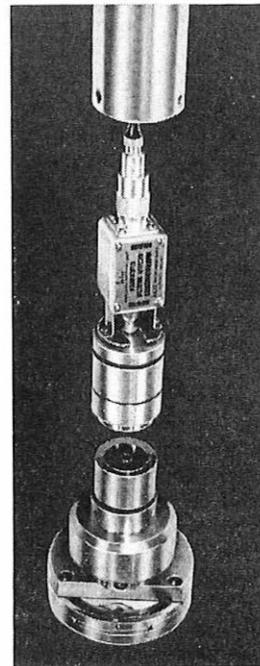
LOWER AERIAL-MAST BEARING AND COAXIAL COUPLING
